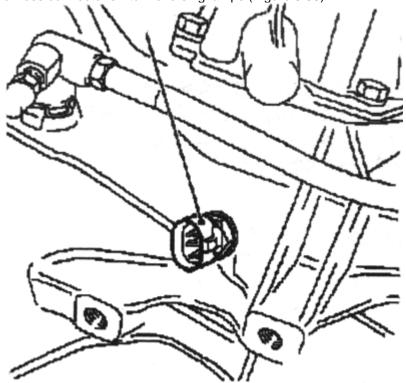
Connector tourniquet wires turned off the consignee lamps rear Stroke:
